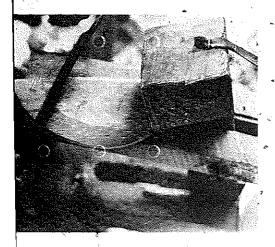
Finish beveling the edges, and smooth off with a pocketknife.
